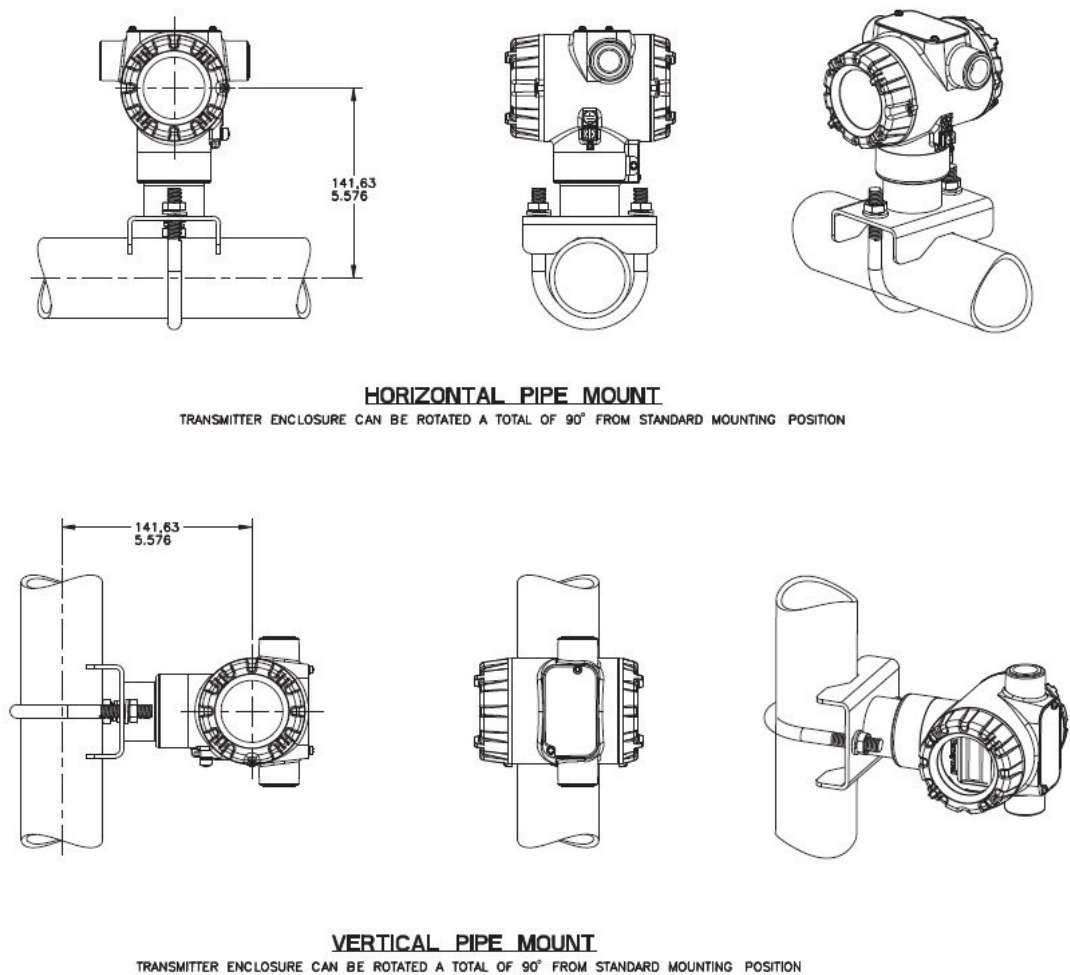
STT850 Pipe Mount, Horizontal & Vertical
